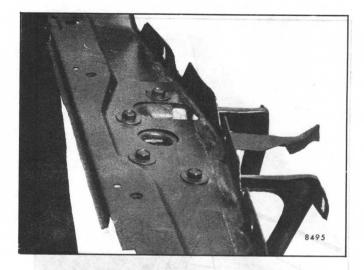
Hood Latch Assembly - "H-07,27"
